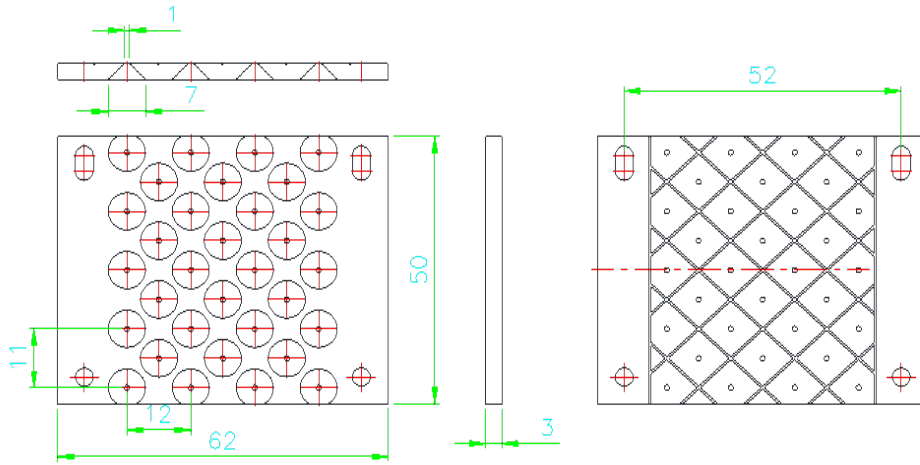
Dimensioned technical drawing of the single target holder adopted at the GIST facility.
